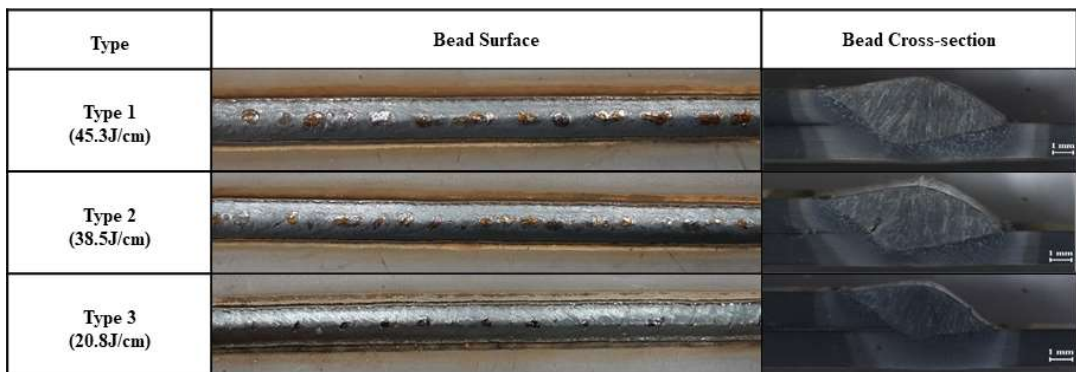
Welding speed 56cm/min; bead surface and bead cross-section
